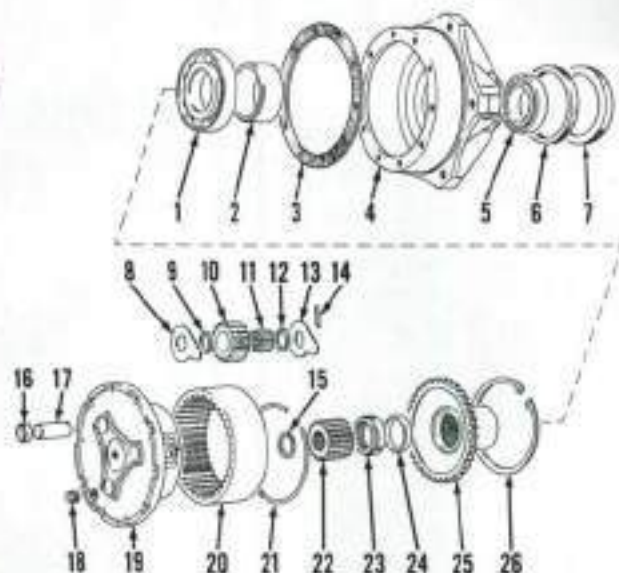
Exploded view of Carraro front drive axle final drive assembly used on 1290, 1294, 1390 and 1490 models and early 1394, 1494 and 1594 models showing component parts and their relative positions
